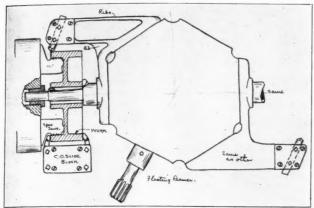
Free-hand Sketch showing Tooling for a Turret Lathe Job
